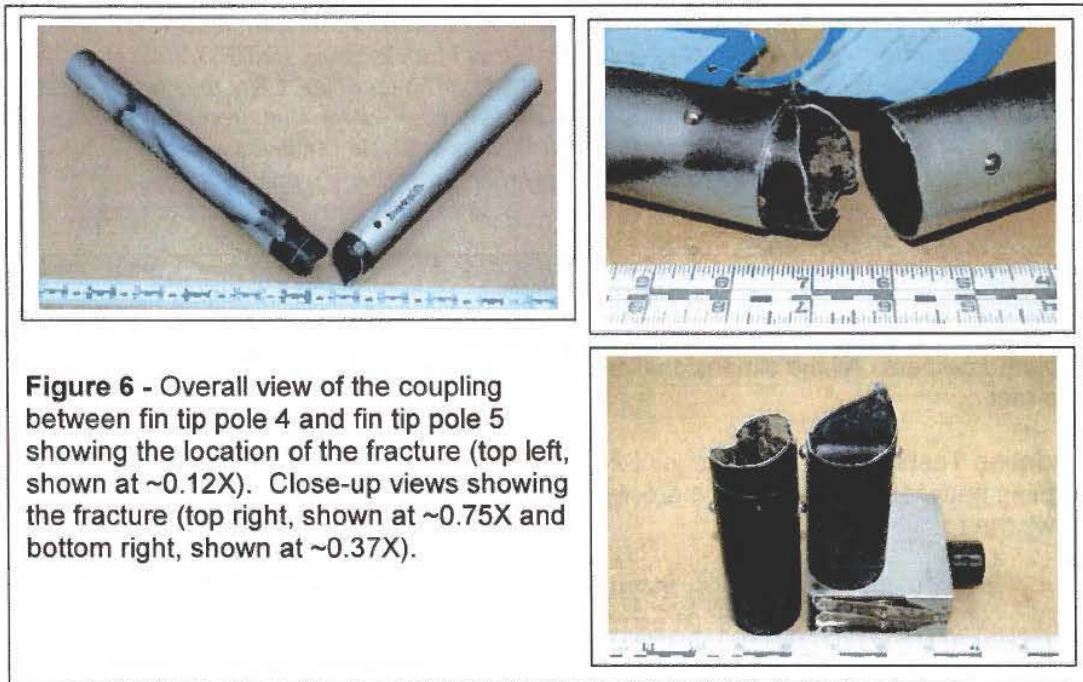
Overall view of the coupling between fin tip pole 4 and fin tip pole 5 showing the location of the fracture (top left, shown at ~0.12X). Close-up views showing the fracture (top right, shown at ~0.75X and bottom right, shown at ~0.37X).
